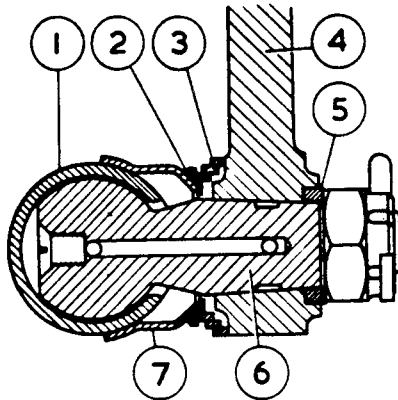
SECTION - BALL JOINT-SIDE STEERING TUBE REAR END.
